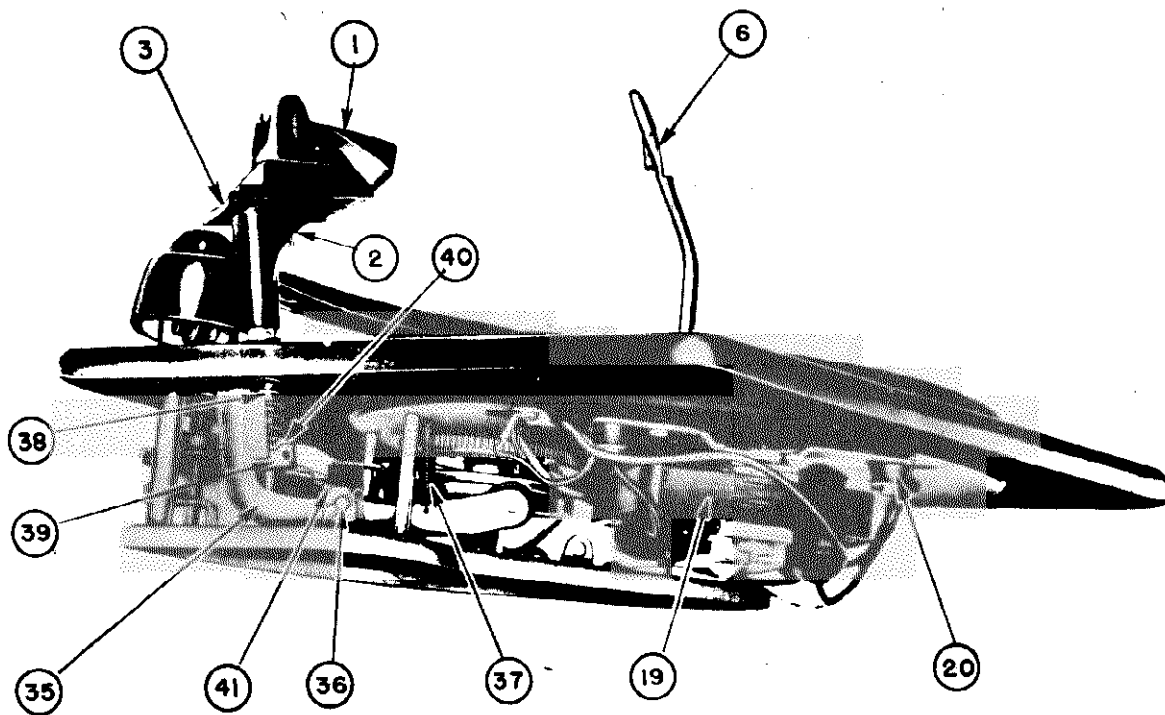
PARTS LOCATION -- LEFT SIDE VIEW
